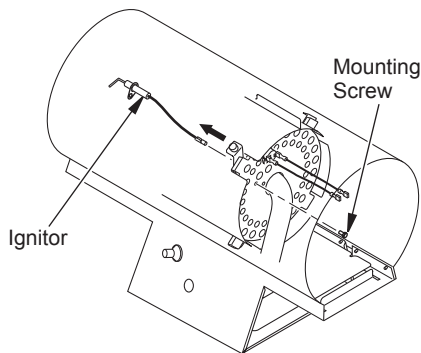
Removing Ignitor Mounting Screw and Ignitor
